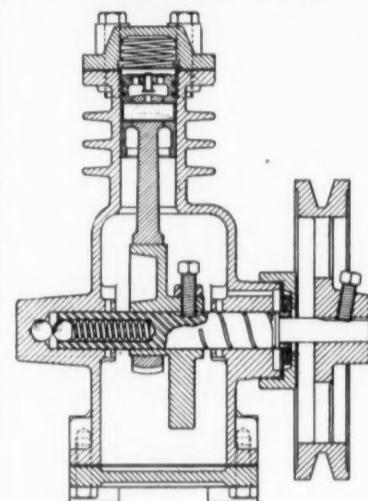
Sketch of compressor body assembly showing counterbalanced eccentric.
